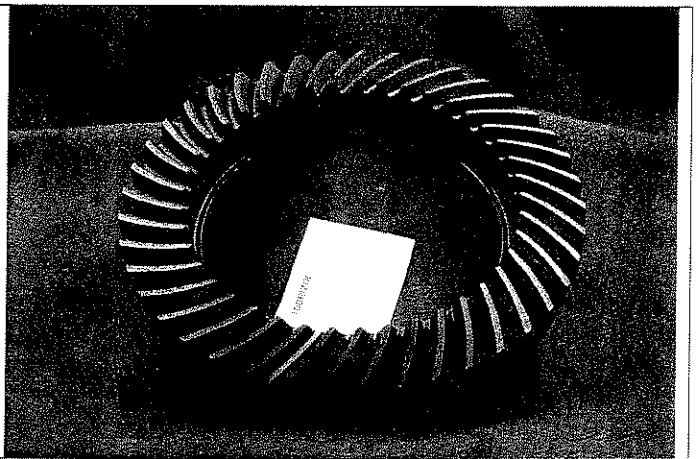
RING GEAR SET #2-AS RECEIVED.
